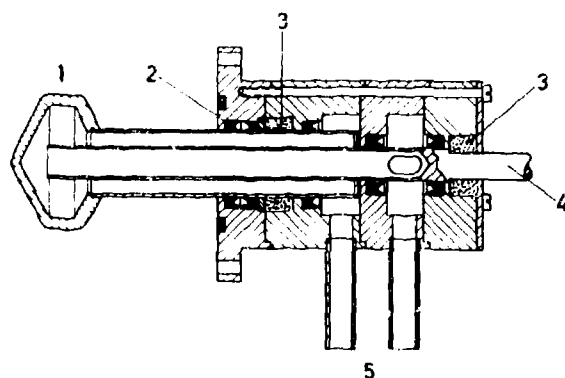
Drawing of a rotating anode arrangement. 1. Anode. 2. Vacuum seal. 3. Self-aligning bearing. 4. Driving shaft. 5. Water connections.
